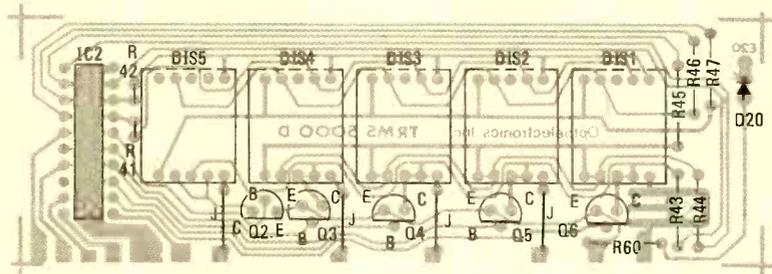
DISPLAY BOARD parts placement. The IC is the display segment driver. The transistors are used in digit multiplexing.
